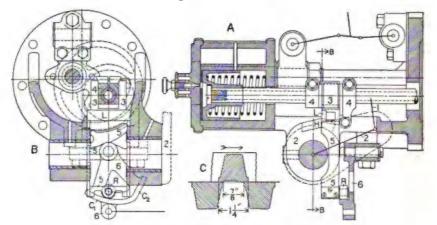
Details of Wheelock Gear. Scale 1 to 8.
